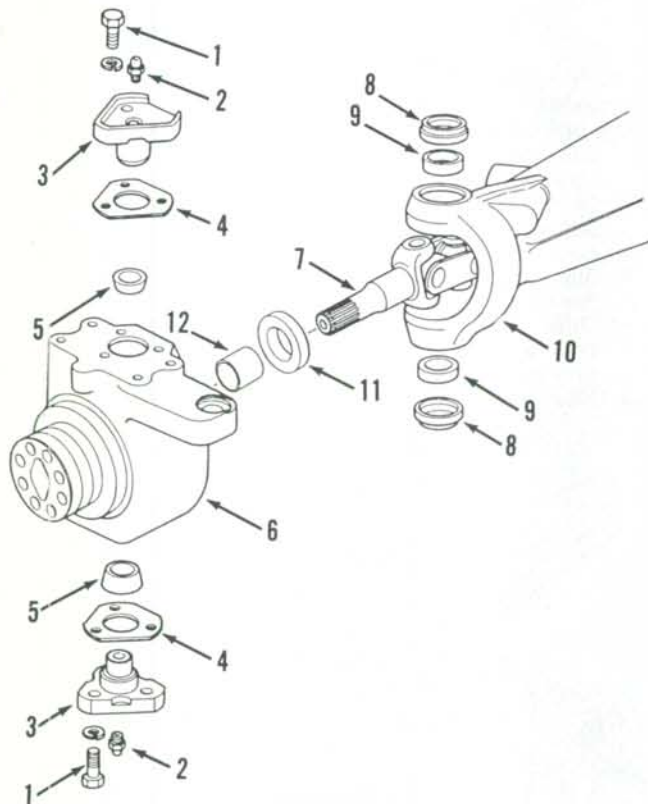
Exploded view of pivot housing and components used on front drive axle.
